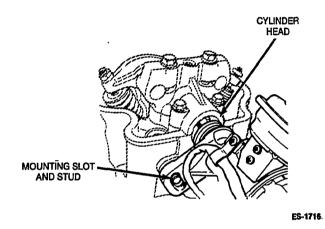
MOUNTING THE DISTRIBUTOR
